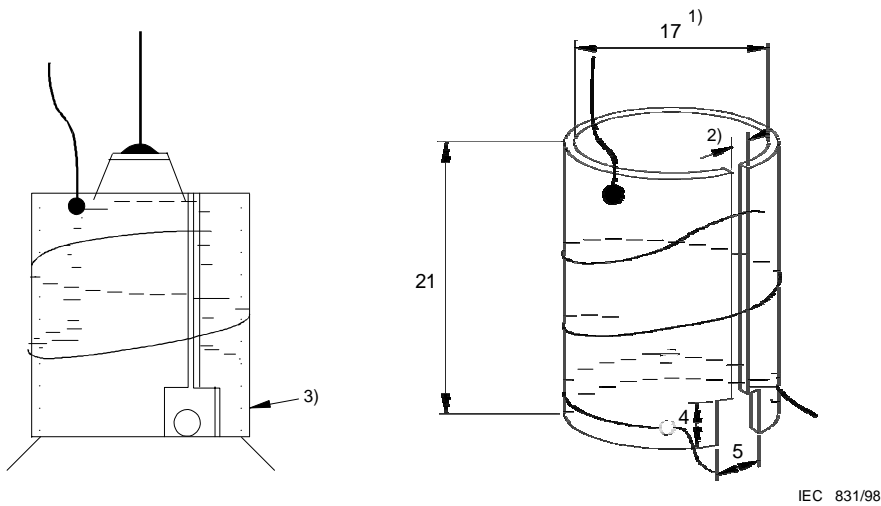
Approximate dimensions of test lampholder for E39 and E40 caps
